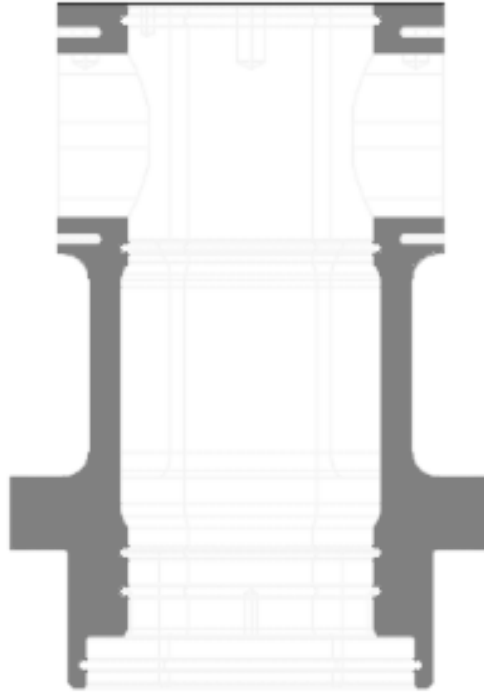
2D Sectional view of lower cylinder barrel version A
